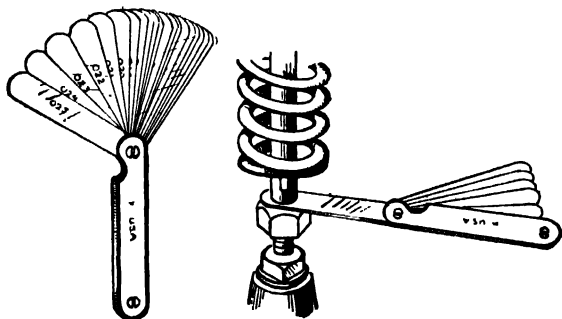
Measuring valve stem clearance with thickness gauge.
